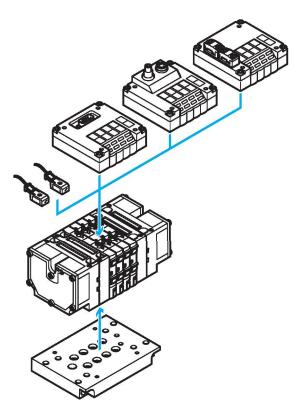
Electrical connection of valve manifolds or valve terminals;
